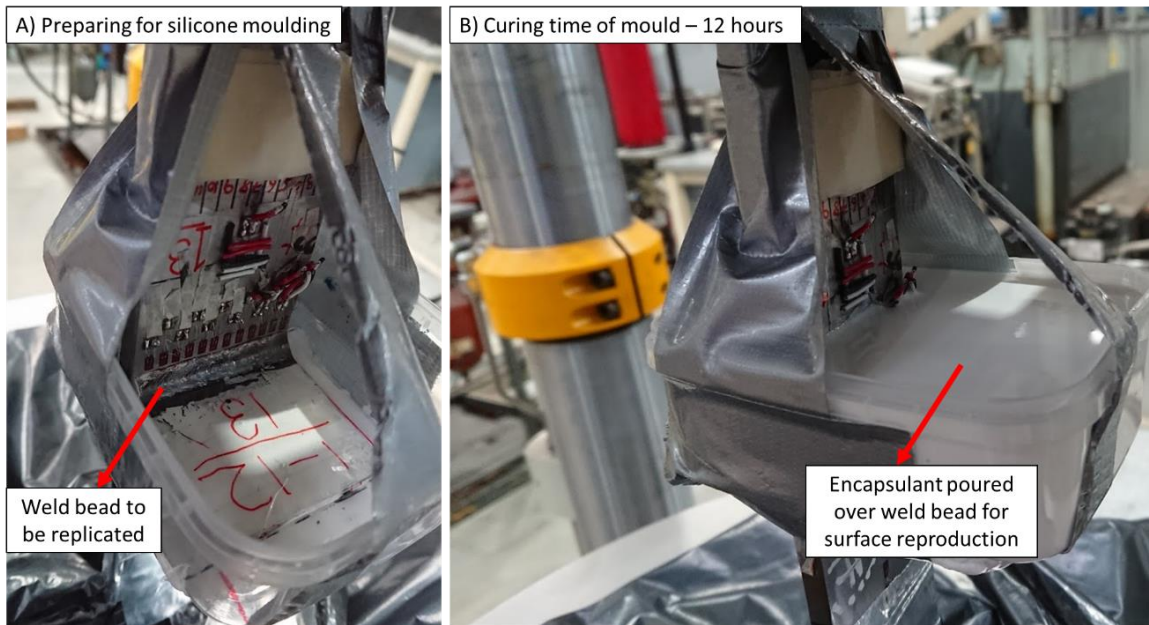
Photographs of the replica process whilst the welded specimen is in the servo-hydraulic testing machine – A) The holder for the encapsulant mix around the weld bead; B) curing of the encapsulant mix.
